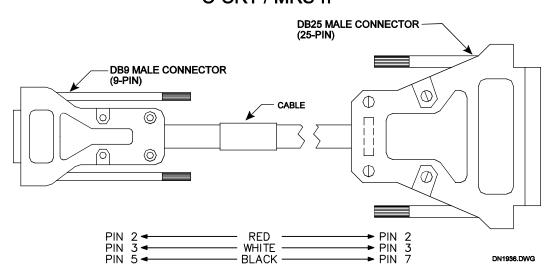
C-CRT / MRS-n Cable Drawing
